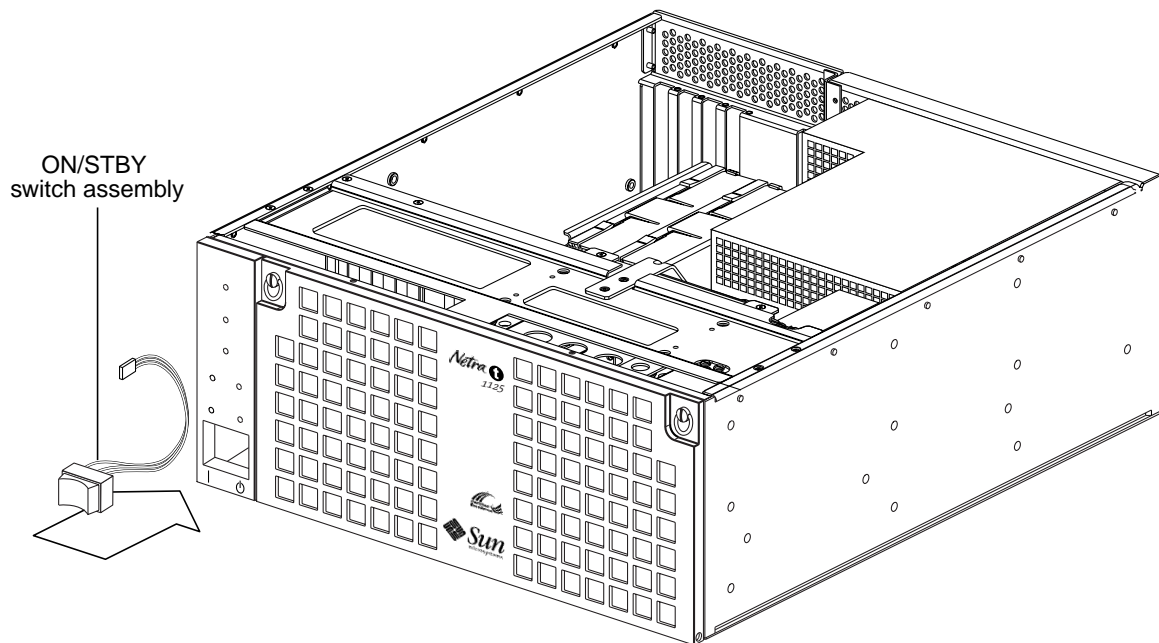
Removing and Replacing the ON/STBY Switch Assembly
